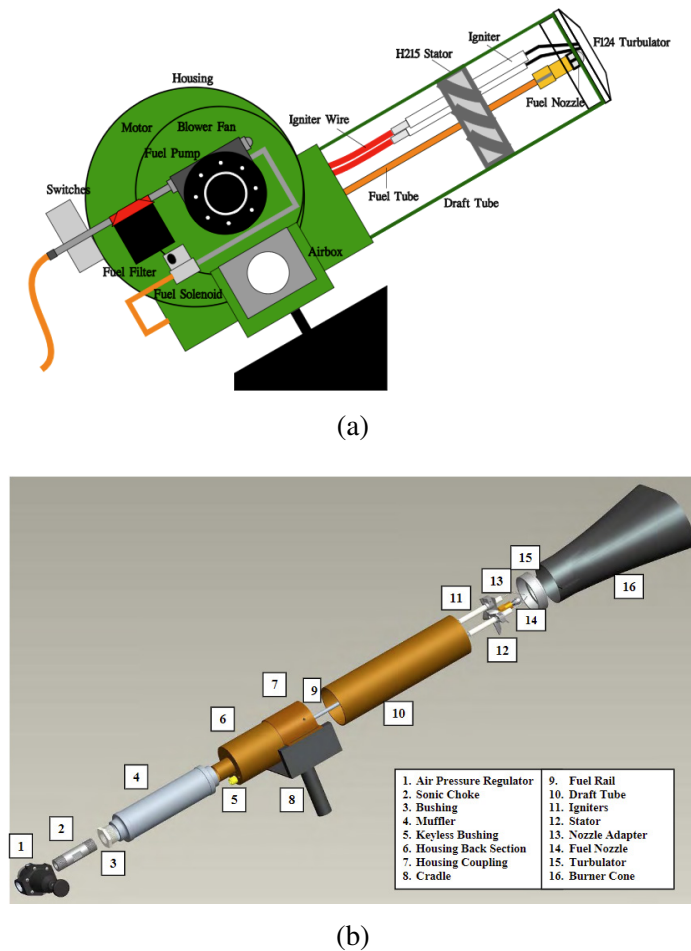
(a) Park DPL 3400 burner assembly and (b) exploded view of the NextGen burner, from [73] under Public Domain.
